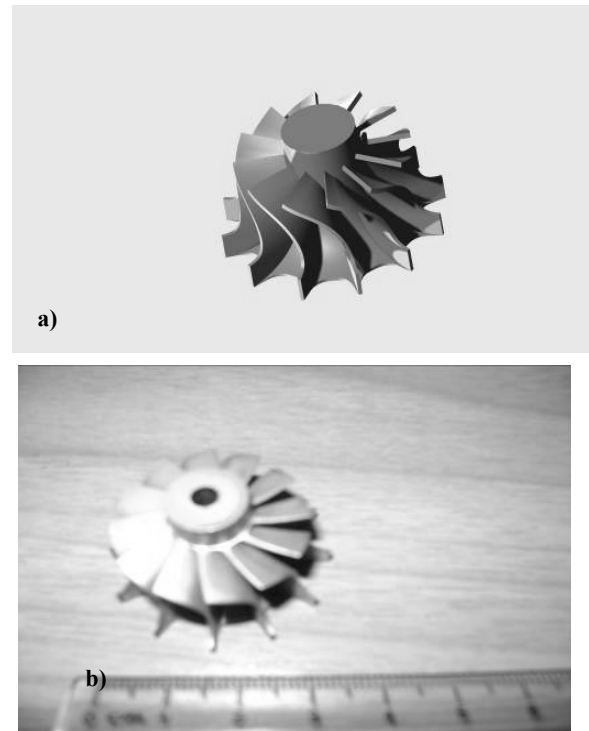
UMGTG-UDR1: Turbine – a) PC design layout, b) impeller
